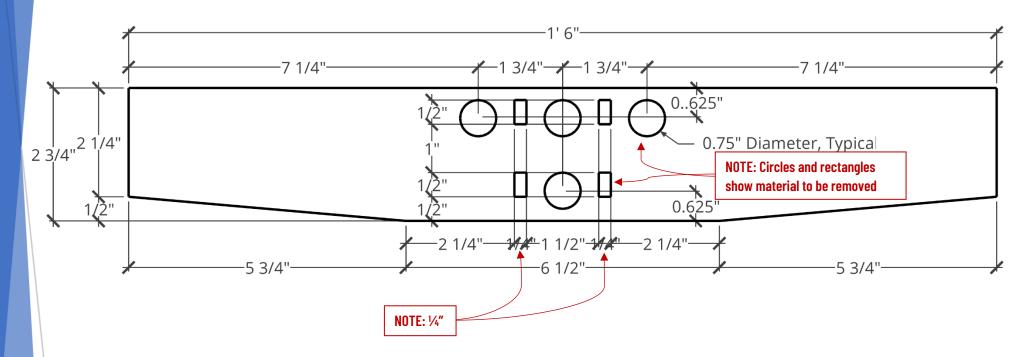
DETAIL DRAWINGS: WING & MAGNETS ASSEMBLY
